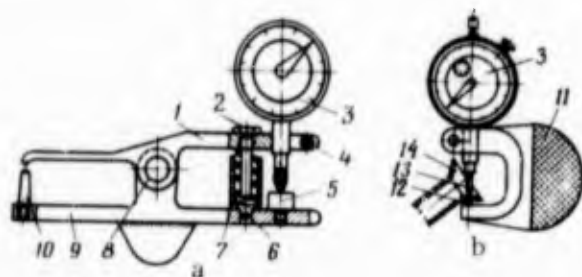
Indicator (a) and Micrometer (b) Devices for Measurement of Thickness of Rolled Portion of Pipe: 1, upper lip; 2, bolt; 3, indicator; 4, draw bolt; 5, support spot; 6, cup; 7, spring; 8, axle; 9, lower lip; 10, tip; 11, bracket; 12, lower support; 13, upper support; 14, pipe
